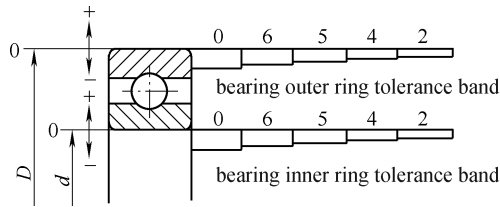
Bearing inner ring and outer ring tolerance band
